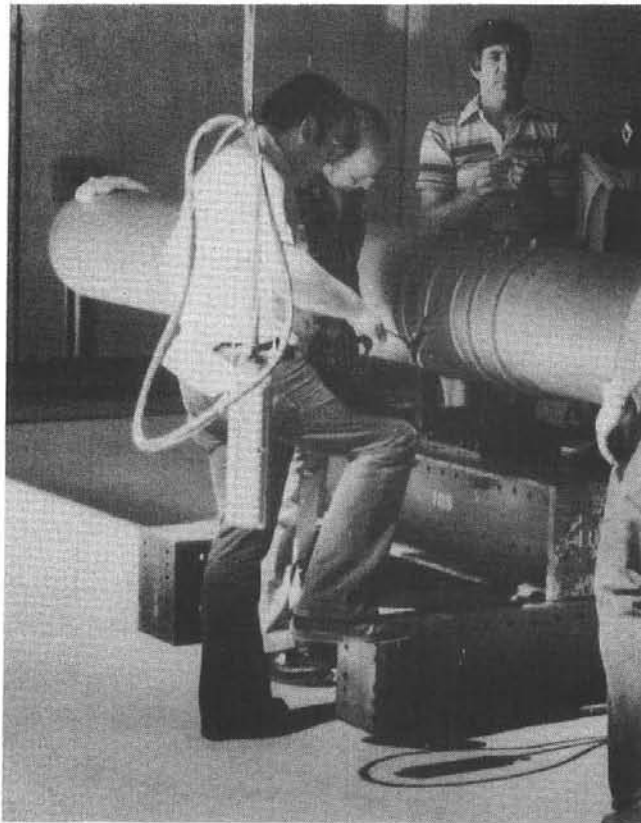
MDAC Elevation Tube Pinned to Assembly Fixture
